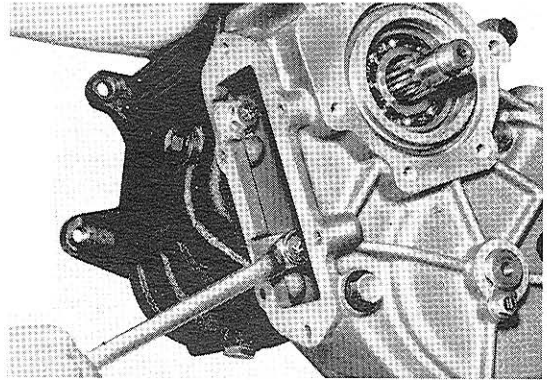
Removing Transfer V0436 Case Retaining Bolts
